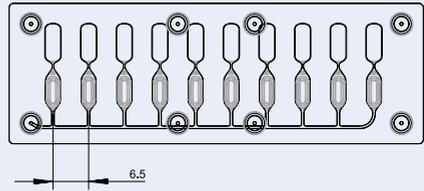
Schematic drawing of batch PCR chip Fluidic 683
